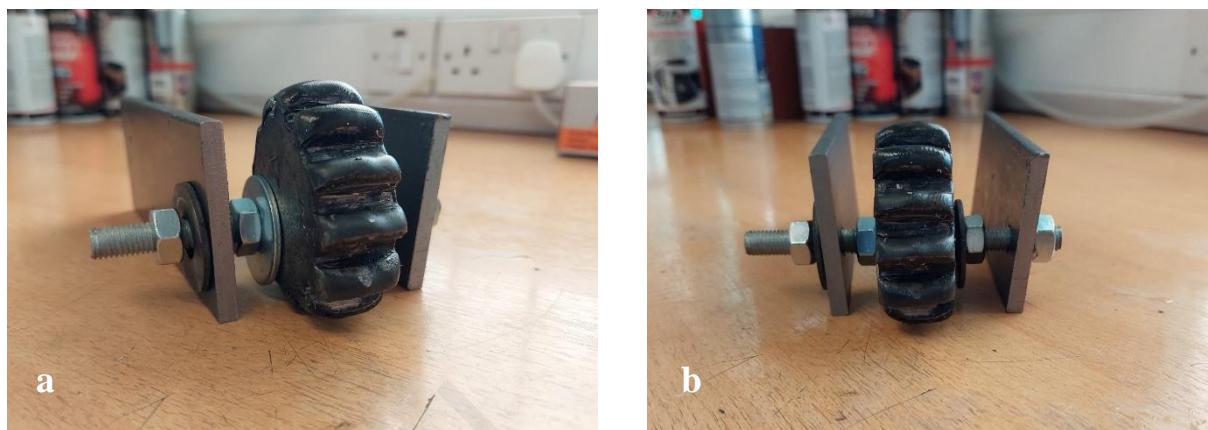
(a) Side view and (b) Front view of gear-holding part used for cutting the gears
